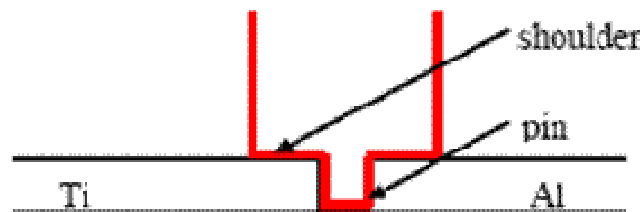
Cylindrical pin tool for the dissimilar Ti/Al FSW
